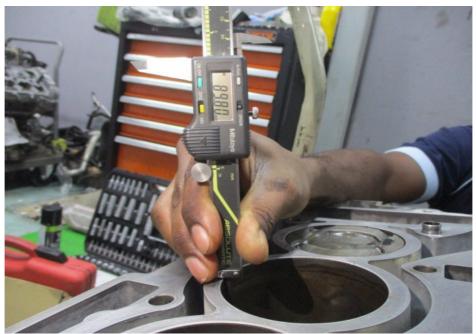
shows measurement being carried out to the bore (arrowed) of cylinder 2 of the BMW engine. The bore measurement of cylinder 2 was recorded to be 83.99mm.
